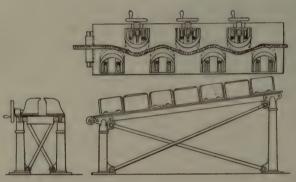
BRIGHT'S HOLDING-BACK GEAR
